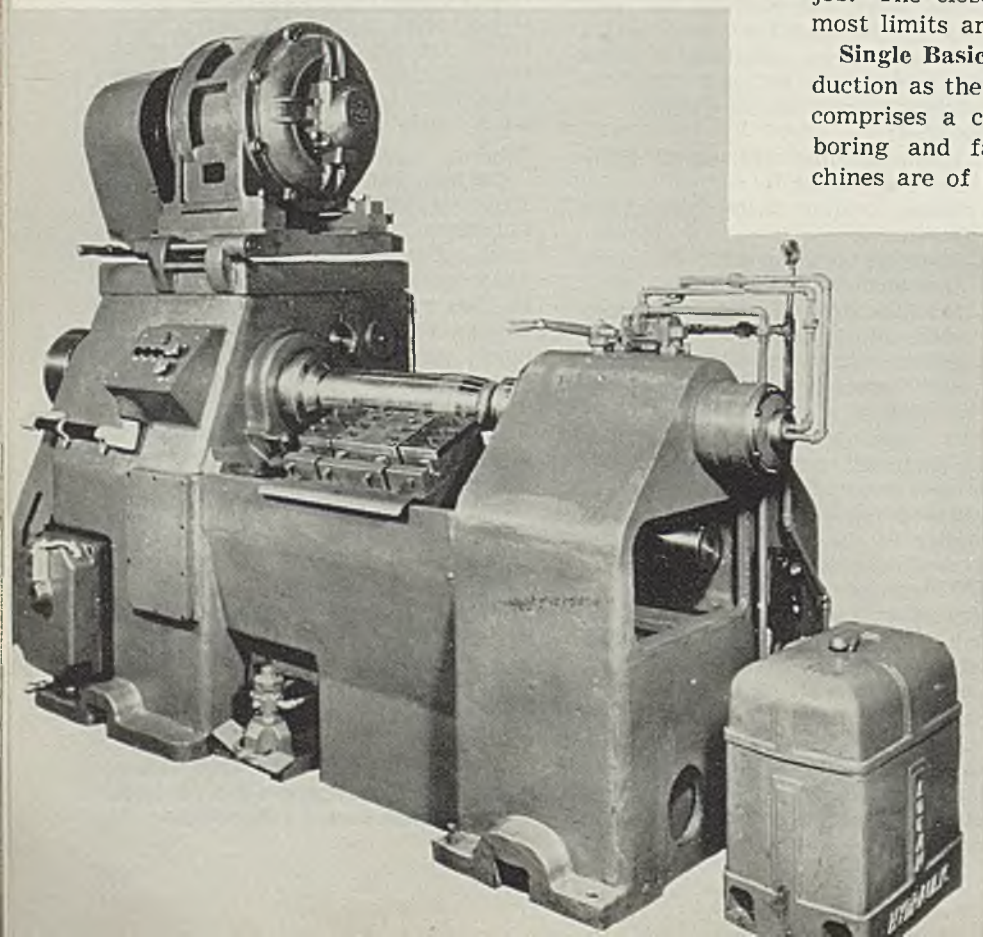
Front view of "emergency" shell lathe of 6-inch type, as designed by National Machine Tool Builders' Association on behalf of United States Ordnance Department. This line of machines, designed specifically for machining shell of particular caliber groups (3 or 6-inch as the case may be) have capabilities of their automatic cycle, speeds, feeds and work-and-tool holding facilities limited in scope to the single purpose for which the machines are built. Efficient though they are on shell, they intentionally are impractical—if not wholly useless—for any other manufacturing purposes. Machine shown is tooled for turning operations only, the oscillating facing and cutting-off tool holders not being used in this particular case
